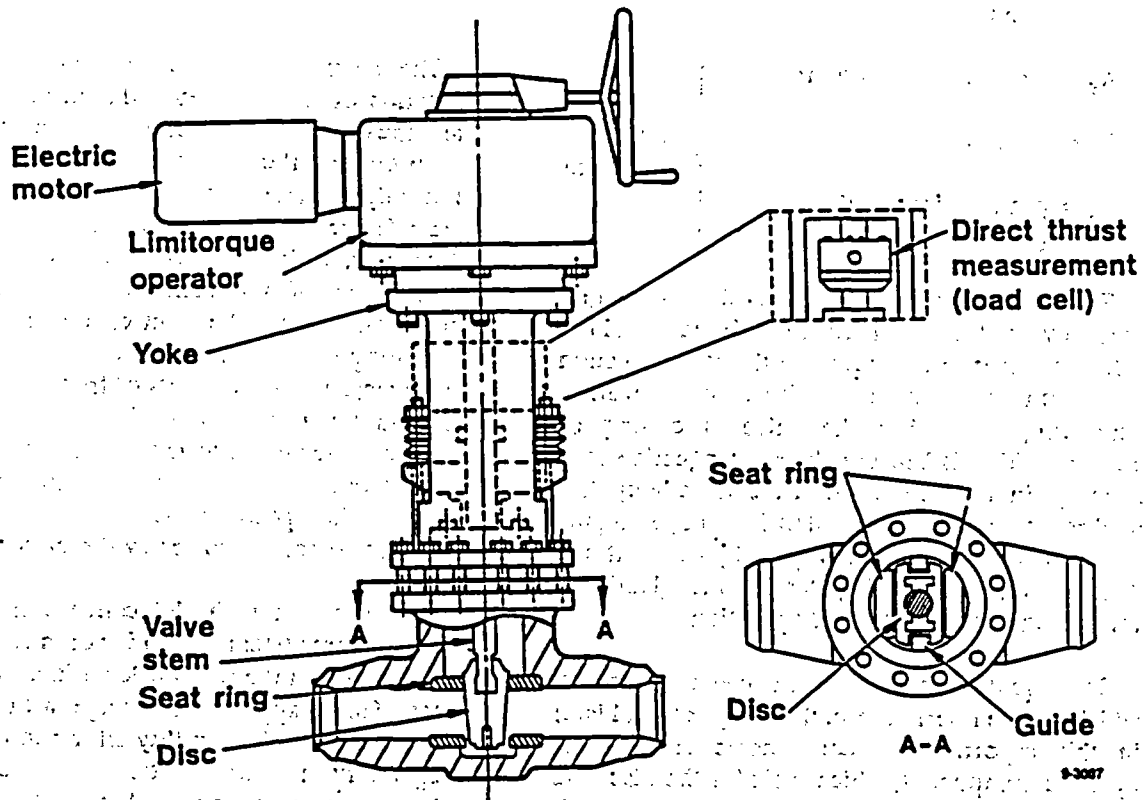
Typical motor-operated valve showing components important to calculating stem force. Two of the test valves were modified by installing a load cell in the valve stem.
